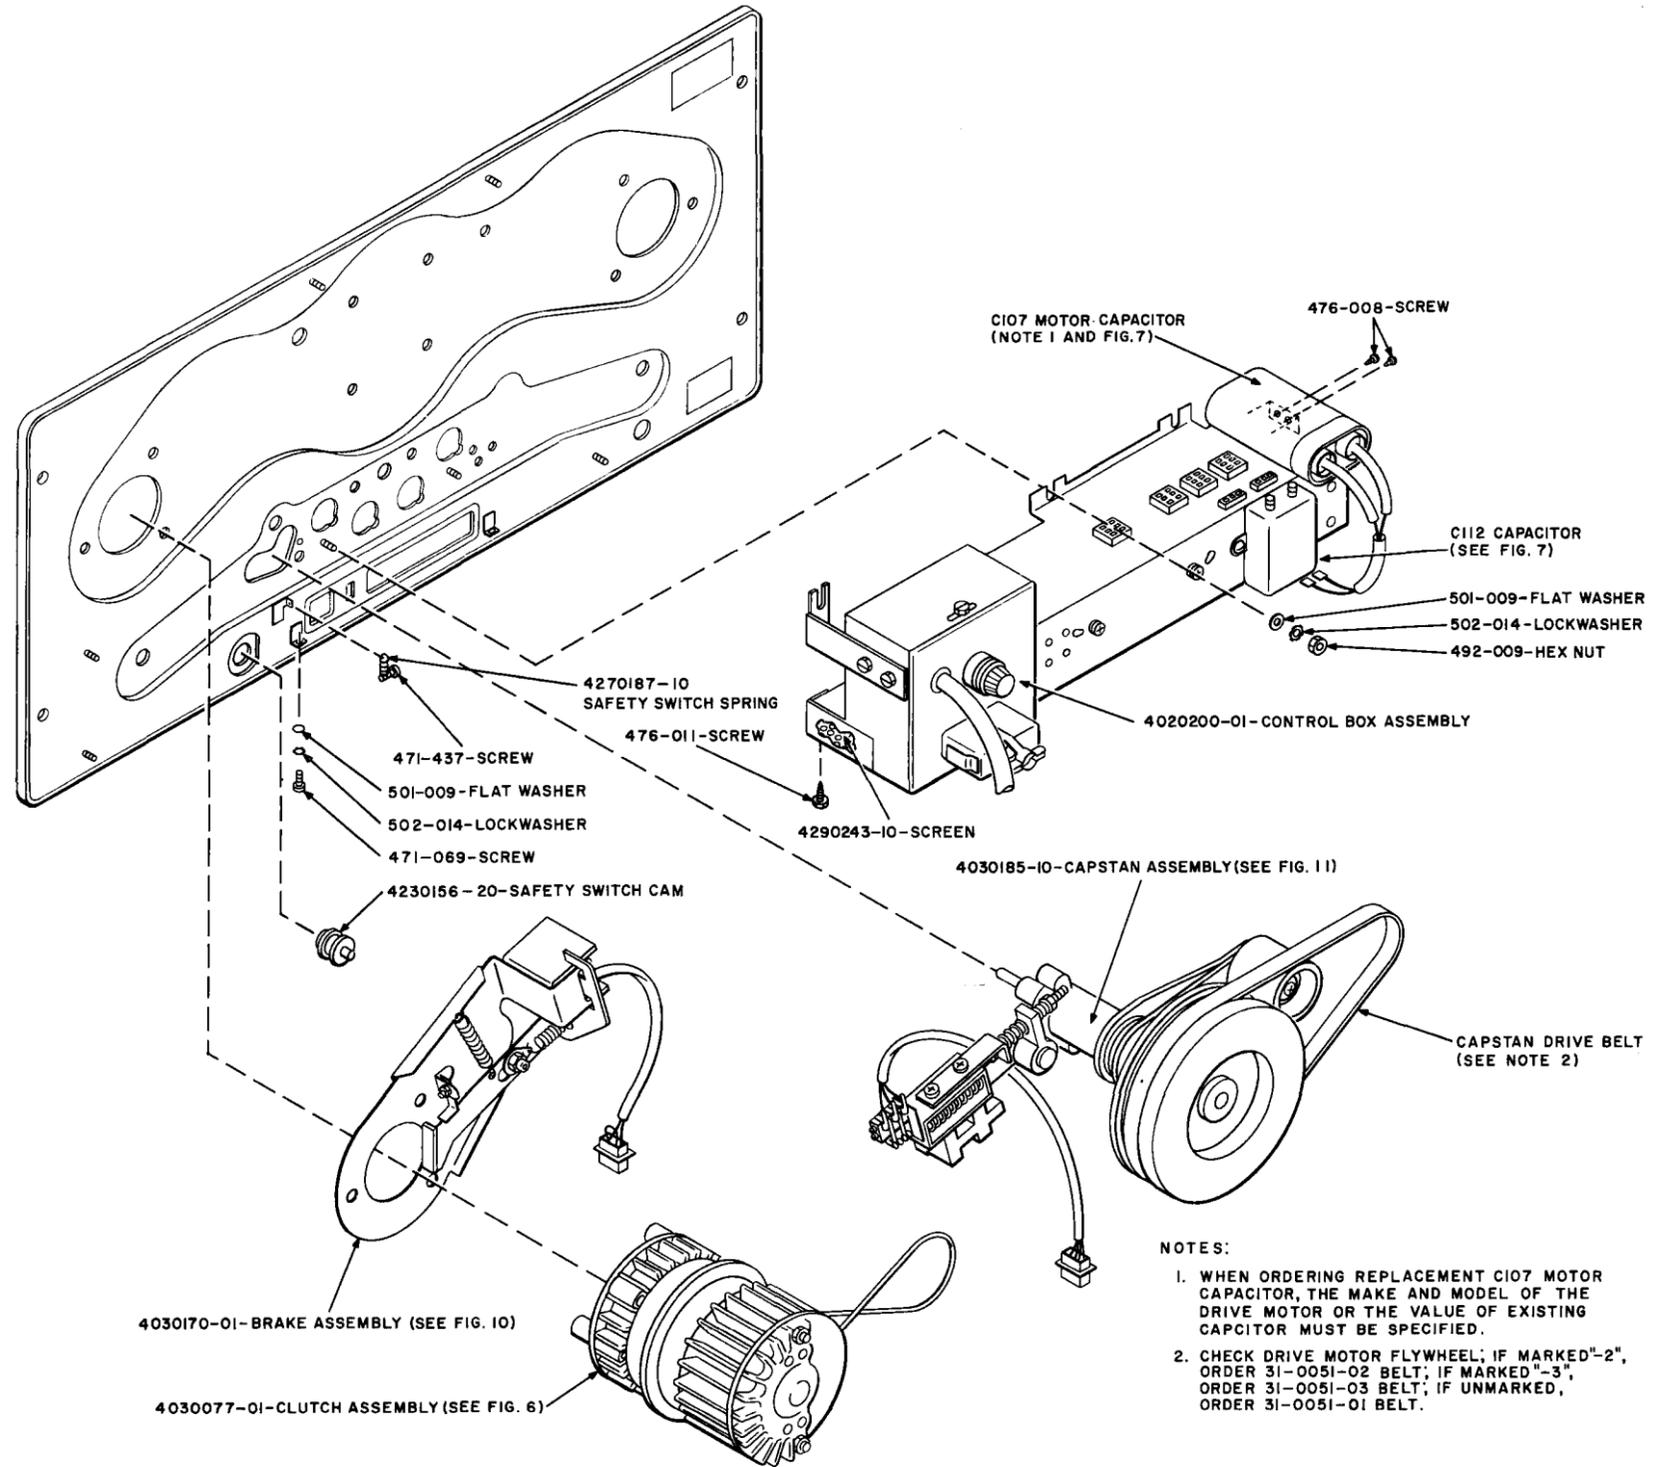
Record-Reproduce Mechanism—Removal of Capstan Assembly, Control Box Assembly, and Miscellaneous Parts
